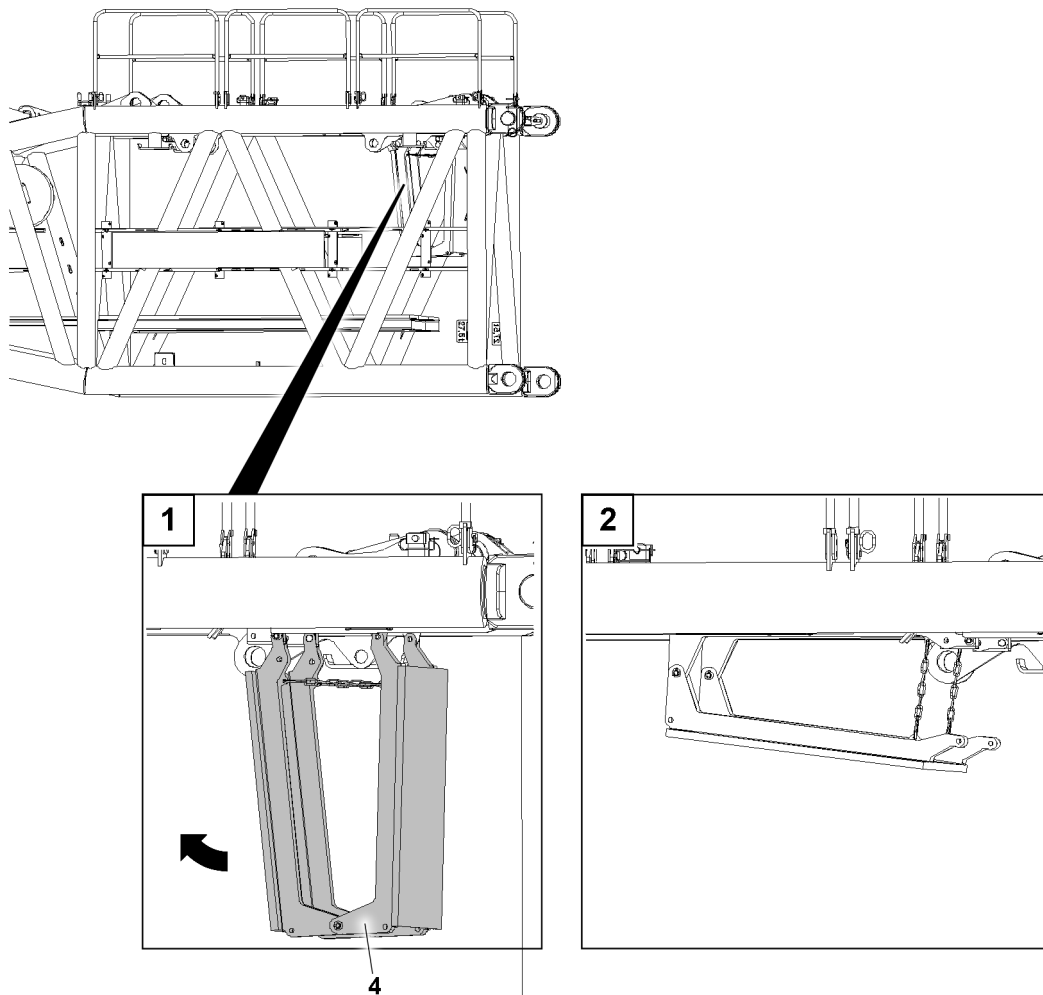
Assembling the assembly pedestal in the operating position — folding up the assembly pedestal
